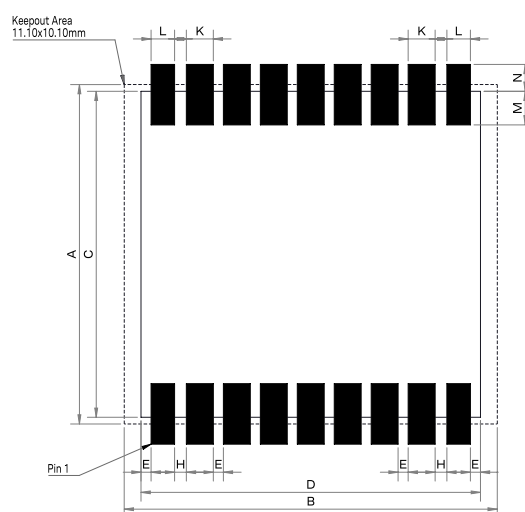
Recommended copper land and solder mask opening for MAX-M10N
